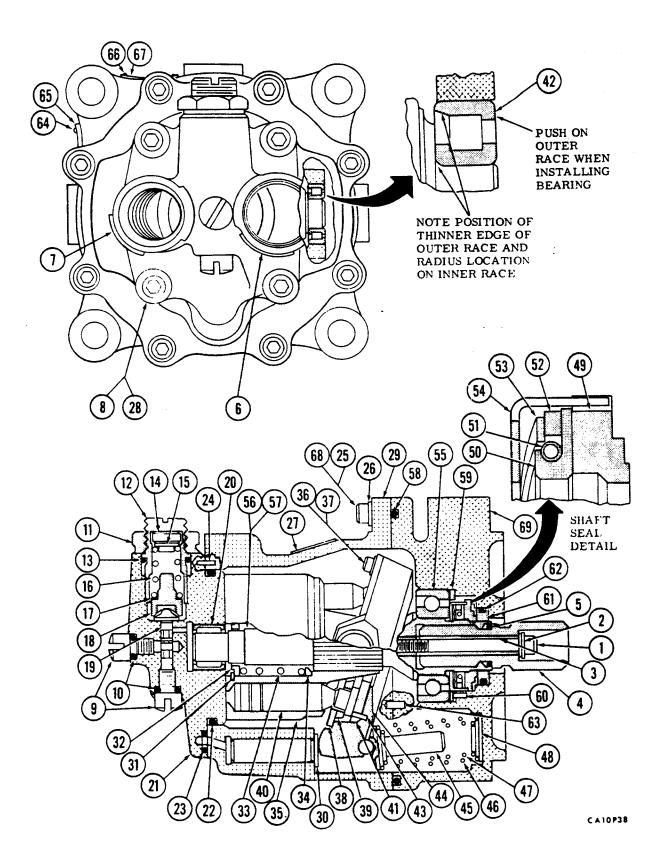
Cross Section View of Hydraulic Pump (Sheet 1 of 2)
